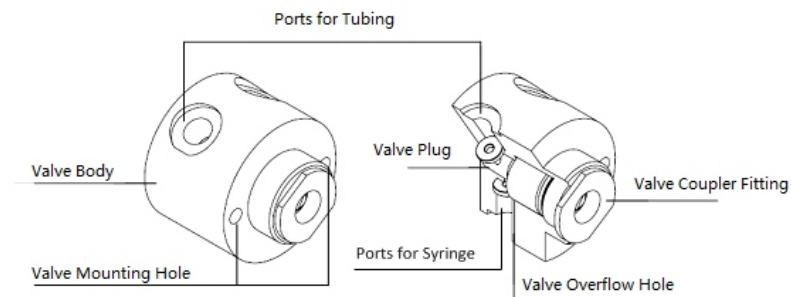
SP1-CX Valve Installing (3-Port Valve)
